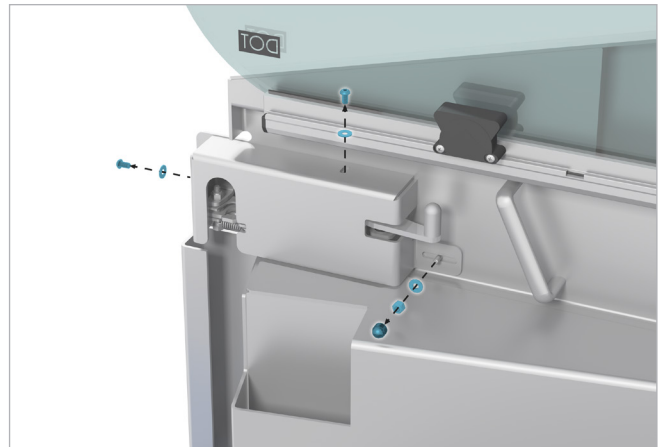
Nut cover, nut, washer, and button head screw locations.
